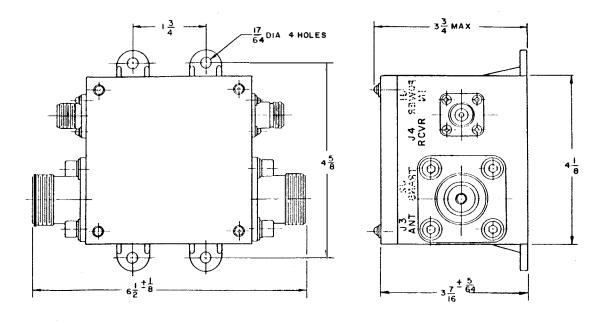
Transmitter Group AN/WRA-3, Dimensional Outline Drawing (Sheet 1 of 2)
